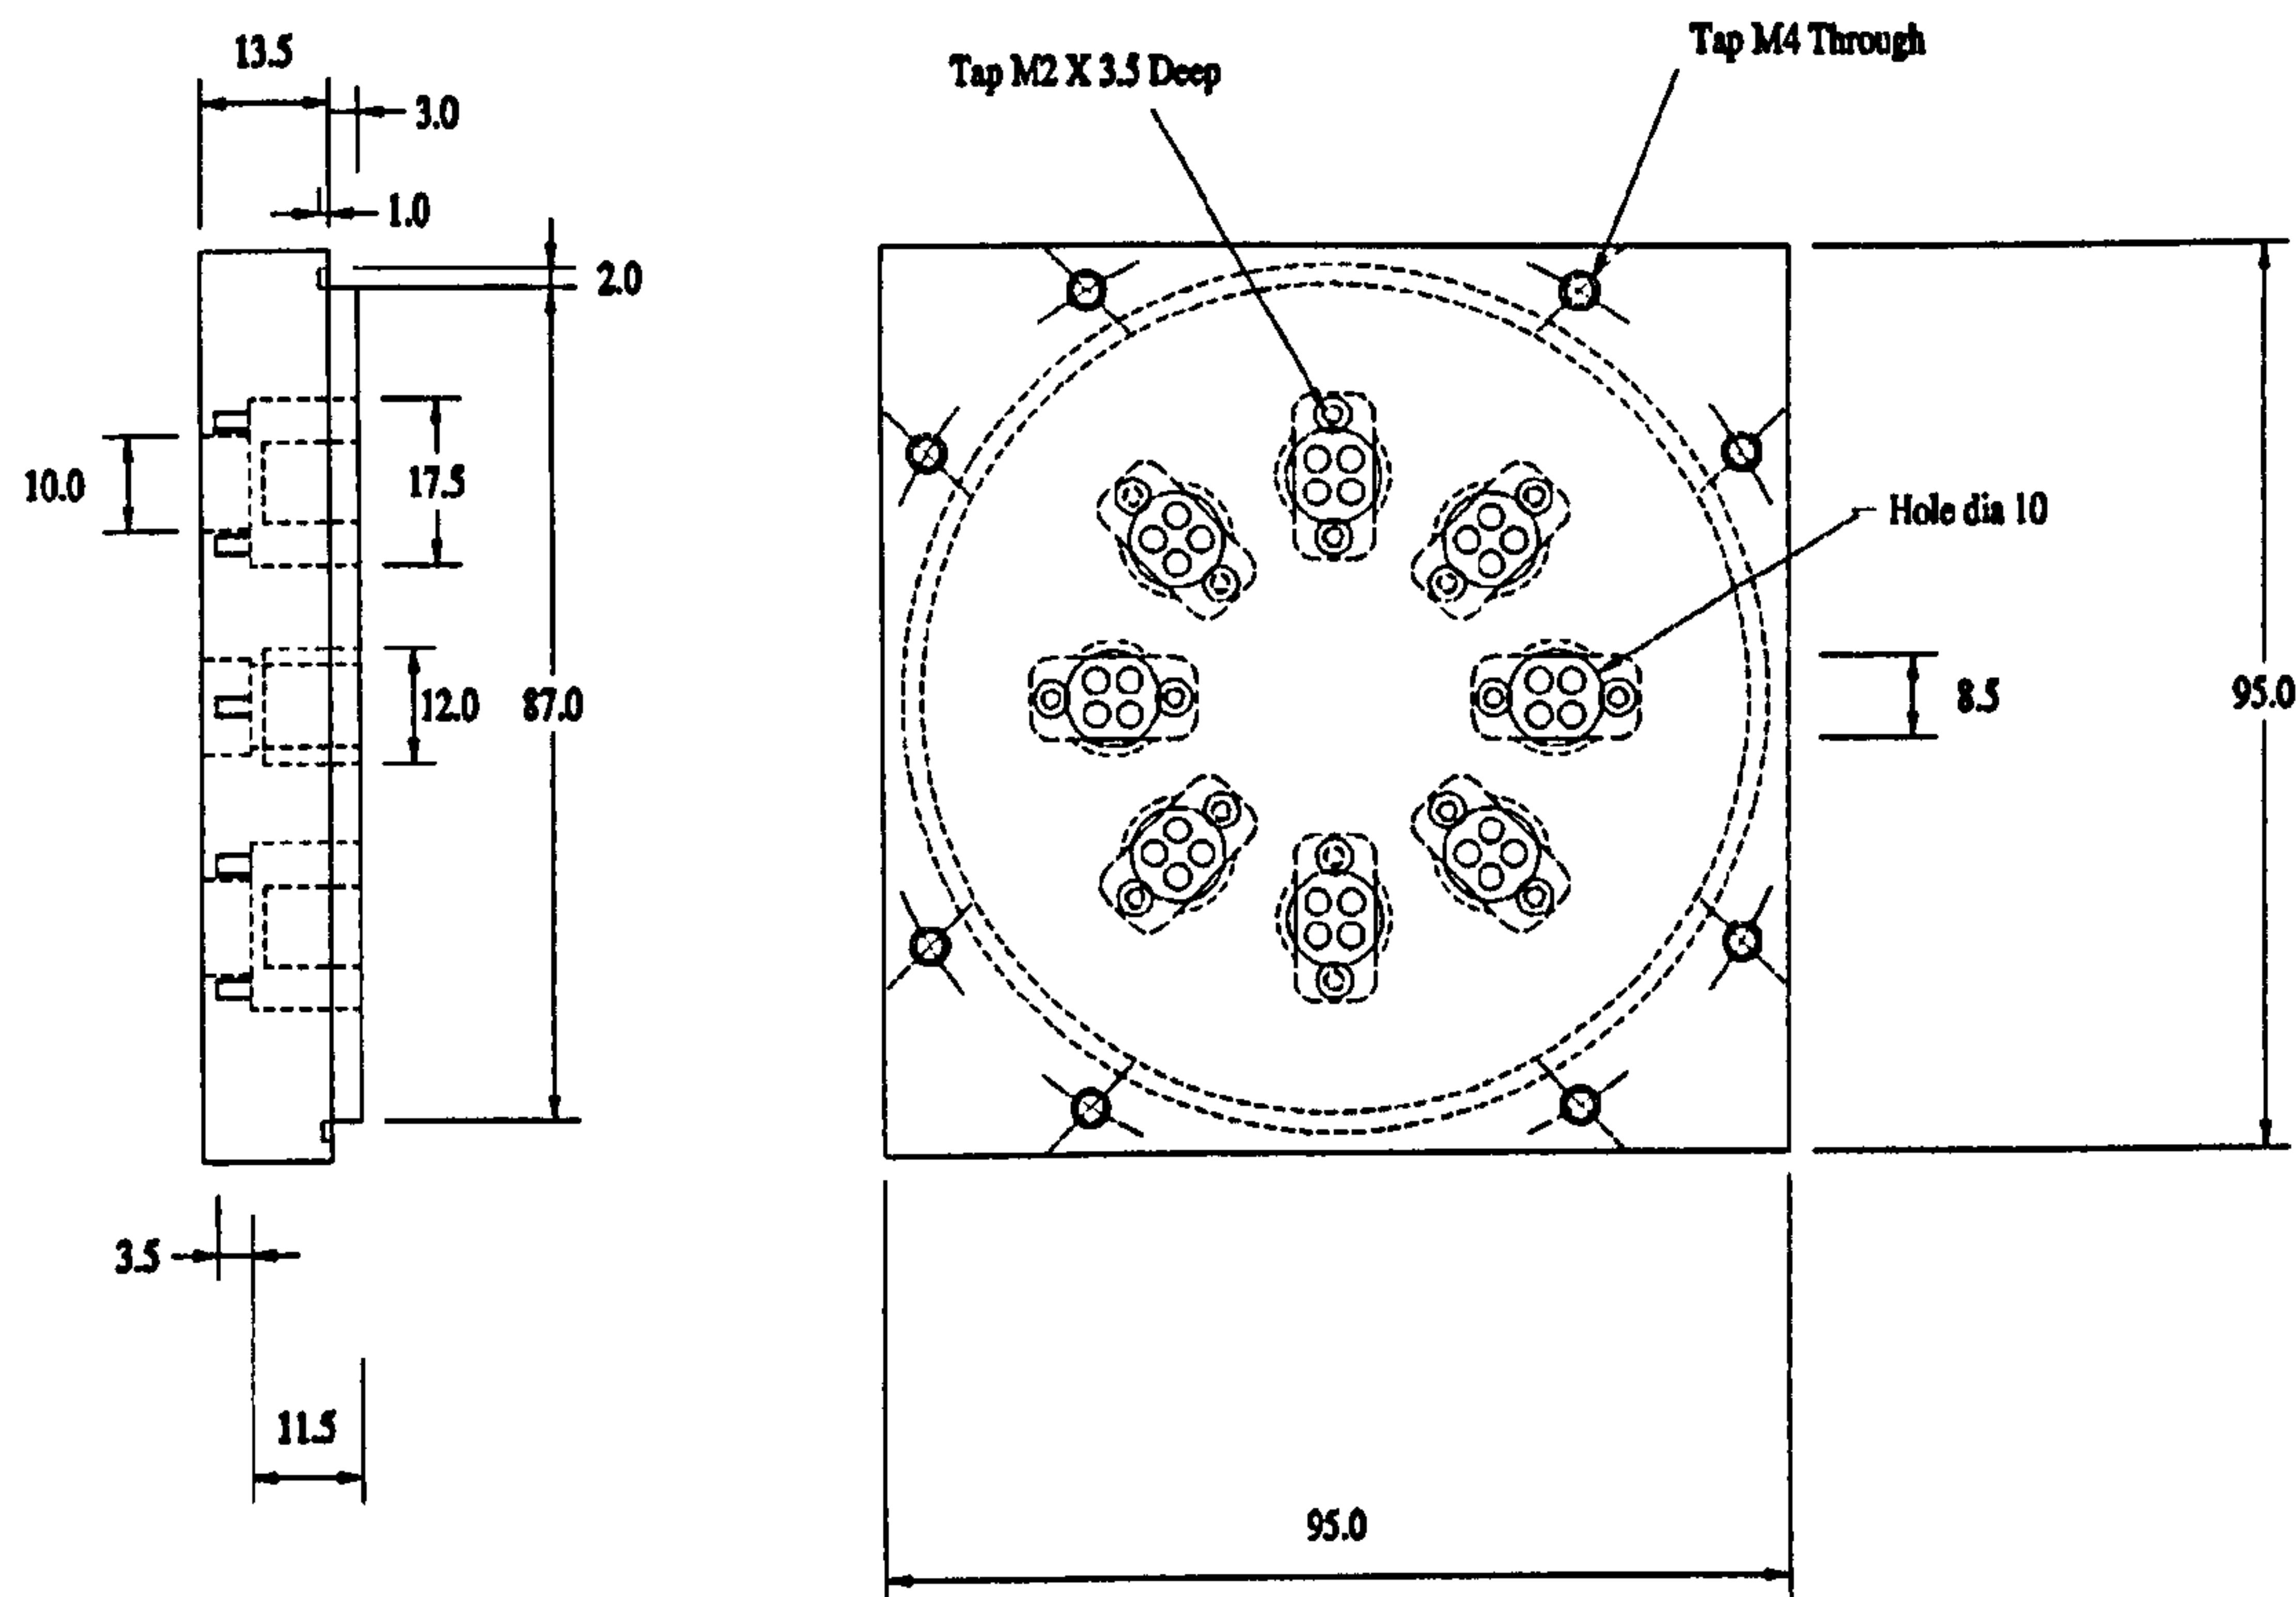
The side and plan view of the chamber top. All dimensions are in mm.
